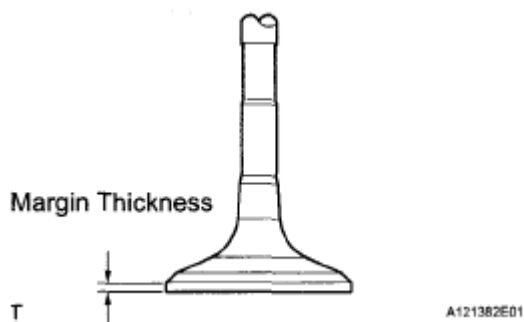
Measuring Valve Head Margin Thickness Using Vernier Calipers
